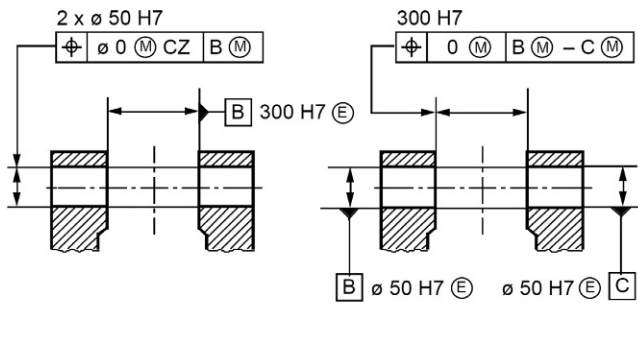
Appropriate tolerancings for the assembly space of the casing
